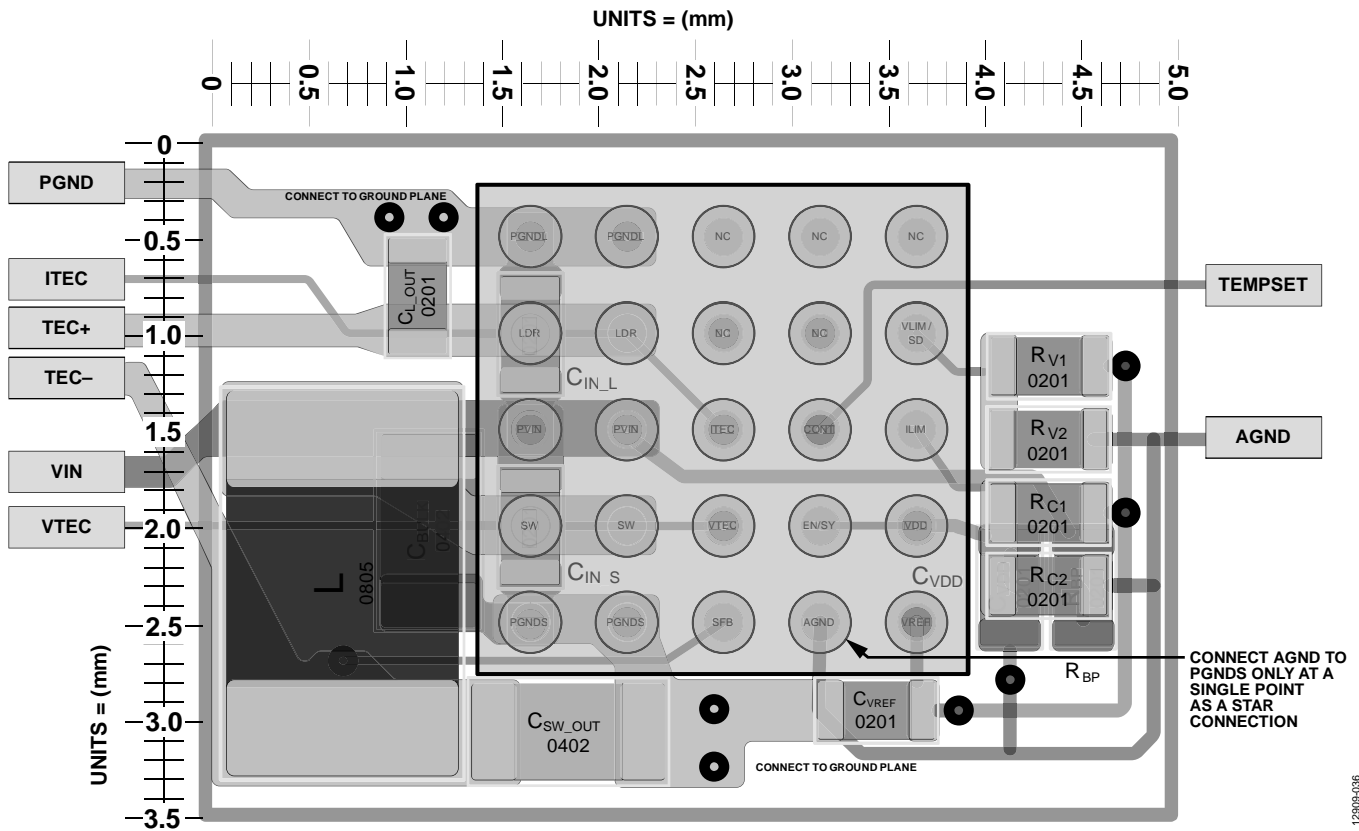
Example PCB Layout Using Two Layers (Top and Bottom Layers)
